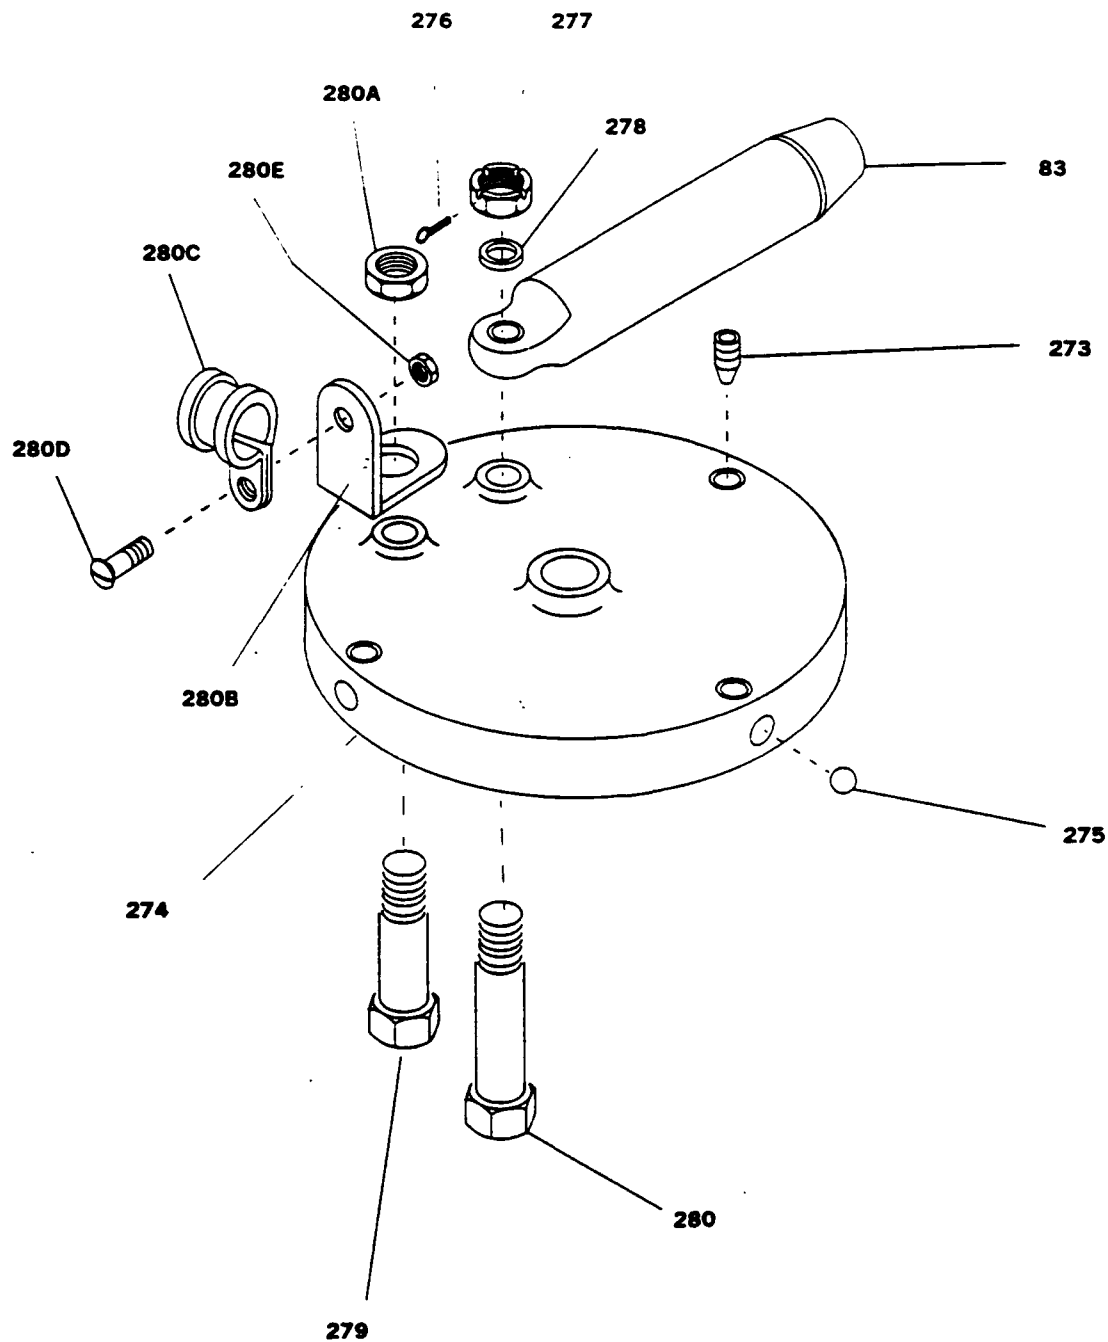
RH Aft Strut Assembly (Sheet 17 of 19)
